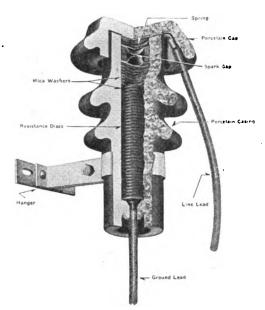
Cross Section of 7500-volt Arrester with Form H Mounting Bracket
